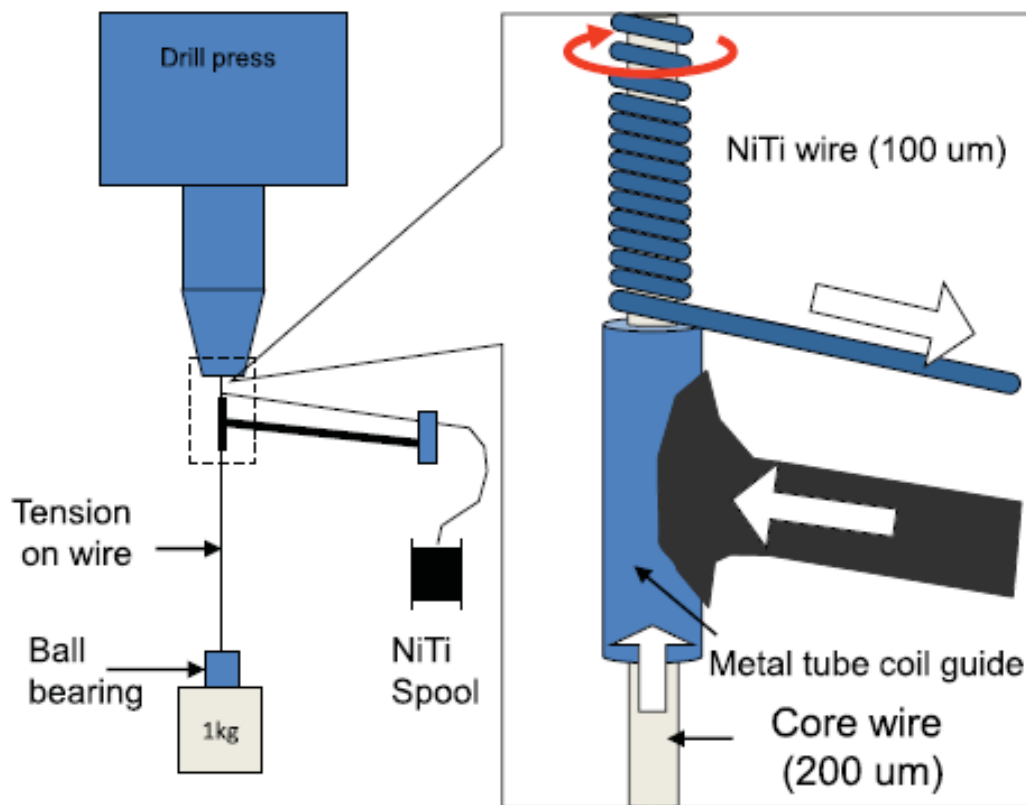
Simple manufacturing system enables the fabrication of long strand coiled springs of NiTi muscle fiber. The core wire is under tension and a NiTi wire is wound around the core. The guidance tube is slightly larger than the core wire. The tension of the NiTi wire is maintained by friction between NiTi and the long bar.
